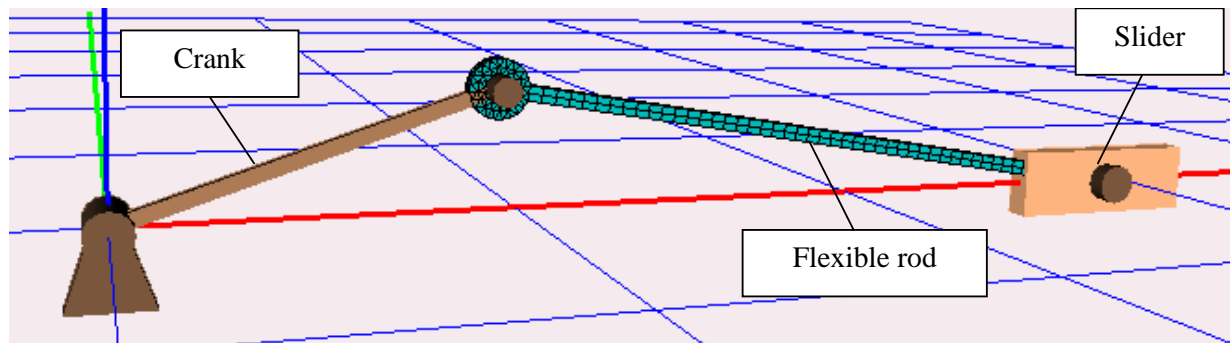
Crank-and-rod mechanism with a flexible rod
